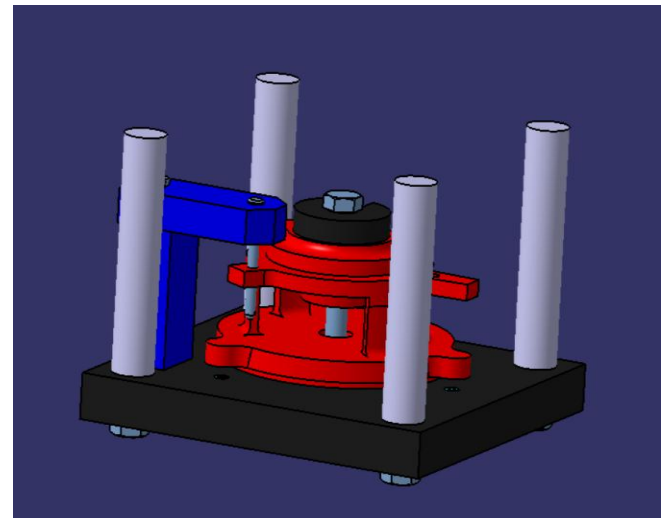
Assembly of Drill Jig in CATIA V5R20
